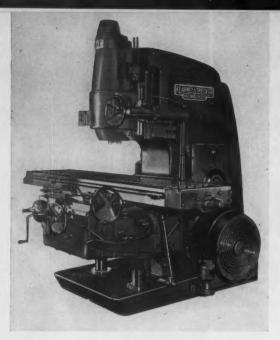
A Kearney & Trecker heavy-duty, vertical, knee type milling machine
